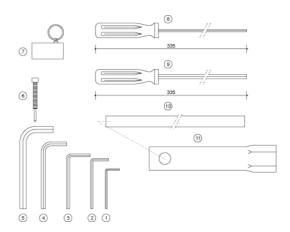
Tool set for 854 ATG (part no. 1854.062)
